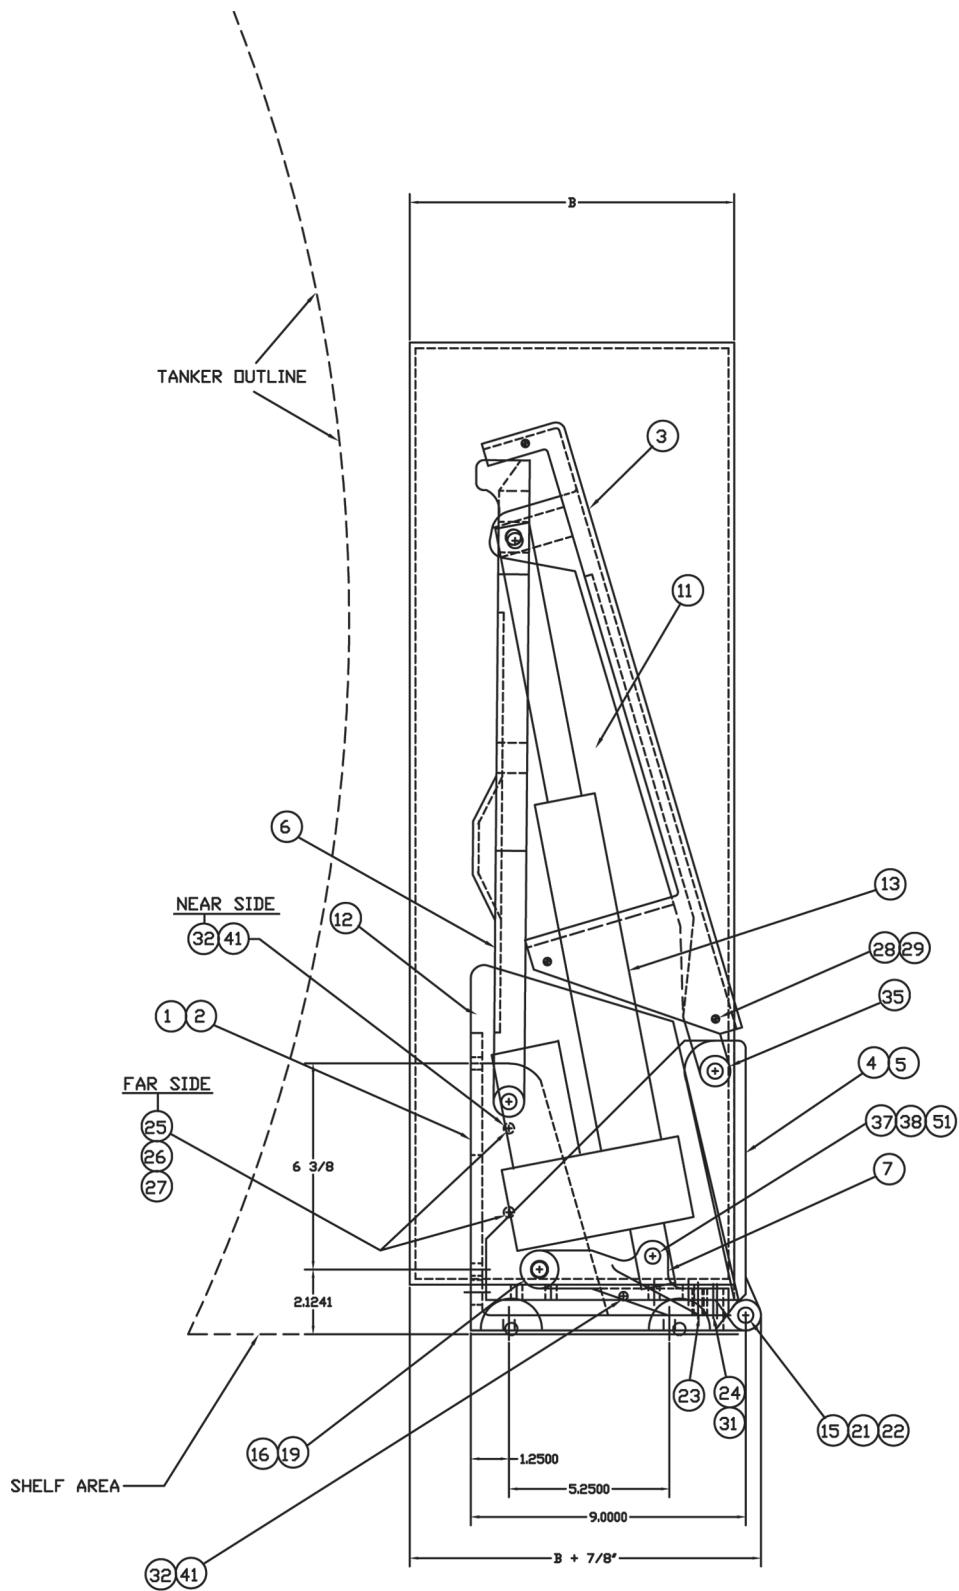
TRUCK END VIEW COMPONENT PARTS
